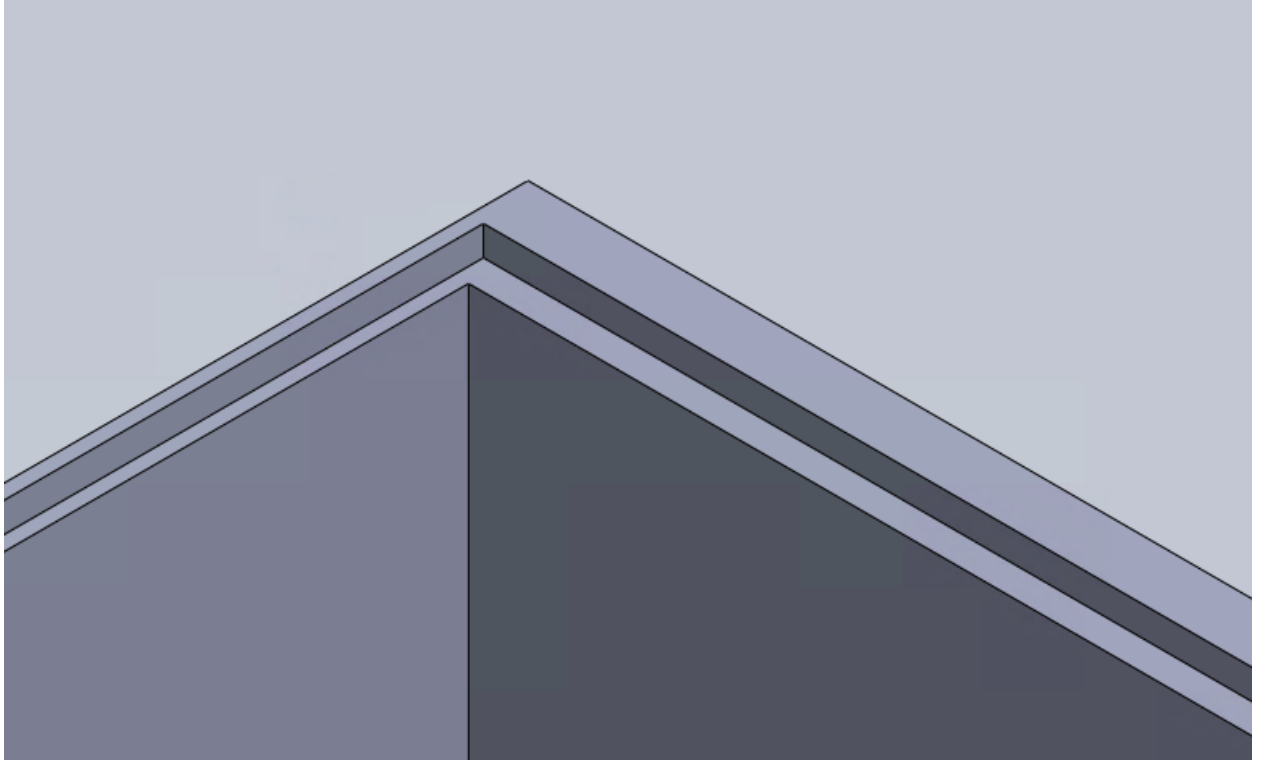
Step Design (Rabbit Joint Fixture) on 16 Battery Casing
